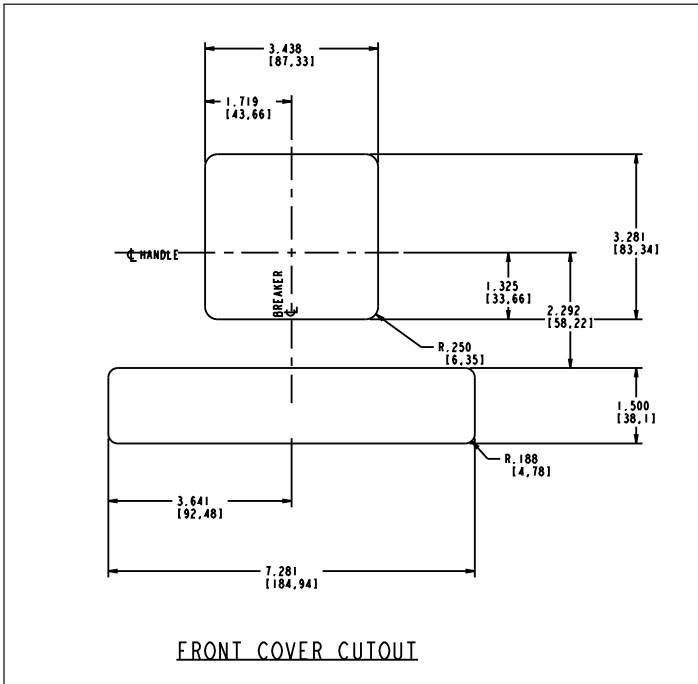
Circuit Breaker Escutcheon Cutout Dimensions.
